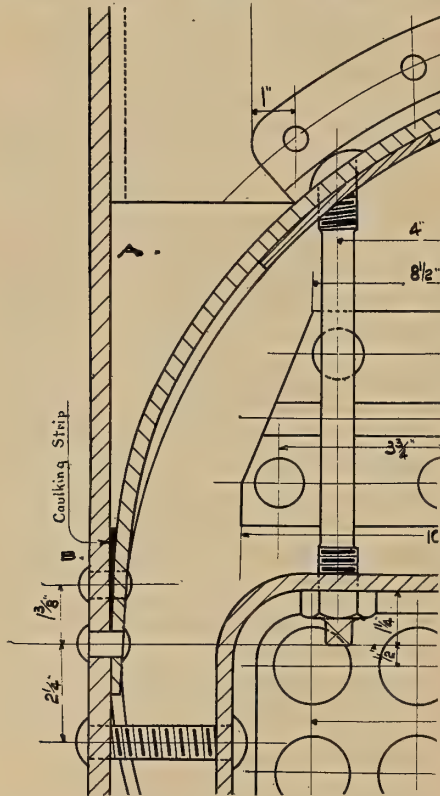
DETAILS OF CONSTRUCTION OF BOILER.
